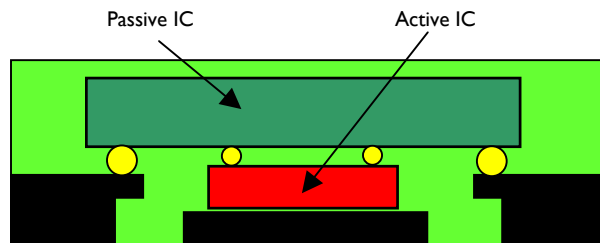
SiP build up using a passive thin-film IC. A double flip-chip technology with solder bumps is used in a standard IC package. Multiple active dies can be mounted on the passive die.
